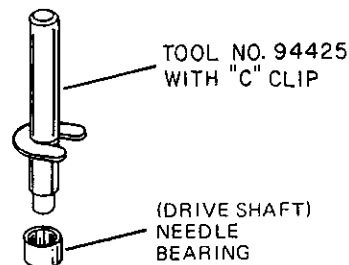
Use tool no. 94425 with "C" clip to install bearing.
